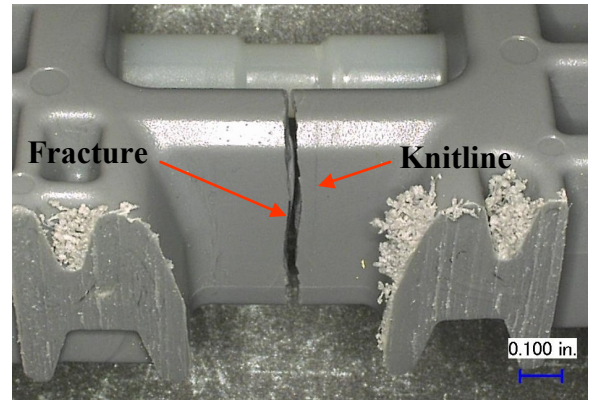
View of the fracture location in the part produced from a gray masterbatch resin.
